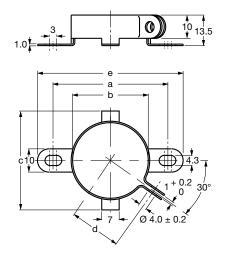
Dimensional outline of clamp for case \emptyset D = 25 mm, 30 mm and 40 mm
